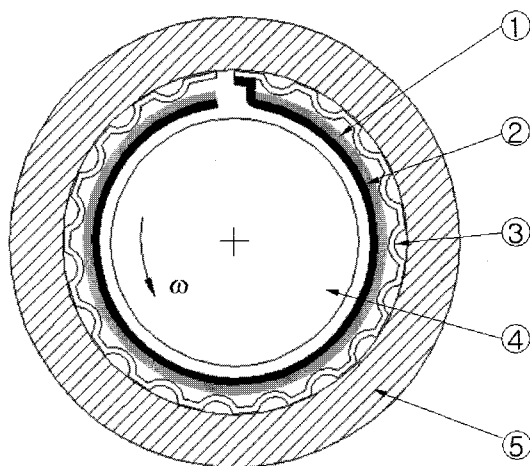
Foil bearing supported super critical rotor ① viscoelastic foil, ② top foil, ③ bump foil, ④ shaft, ⑤ sleeve
